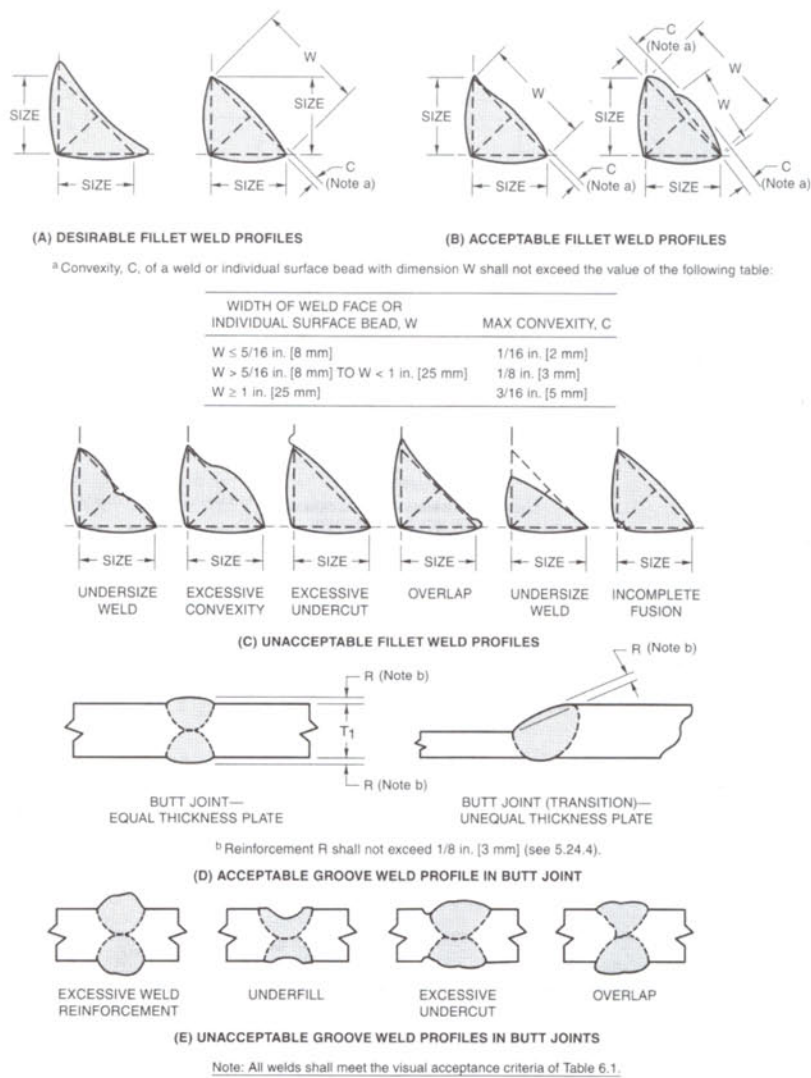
Acceptable and Unacceptable Weld Profiles (see 5.24)
